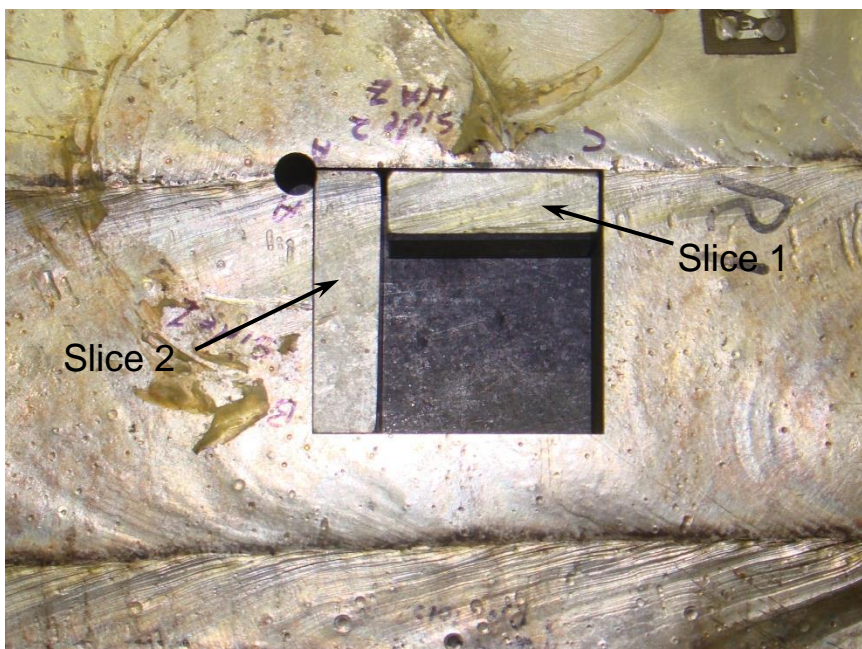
View of the two 10 mm thick slices that were electrodischarge machined from the welded plate to allow measurement of the thickness of the various weld zones.
